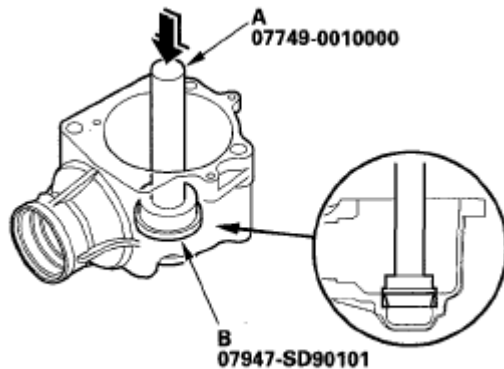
Installing Tapered Roller Bearing Outer Race, Driver And Oil Seal Driver
